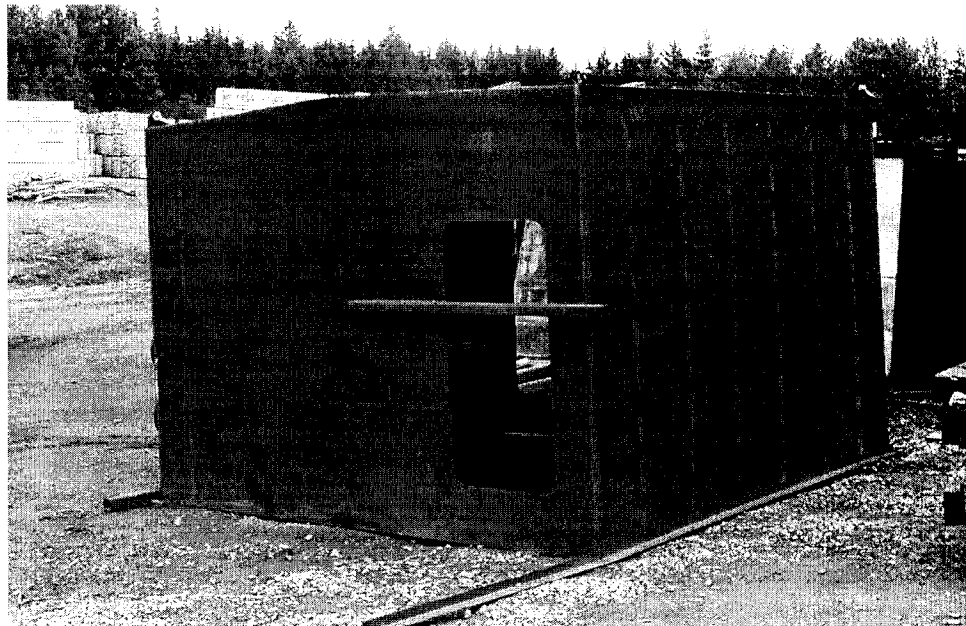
Machine House complete with internal scantlings and door holes before painting.
